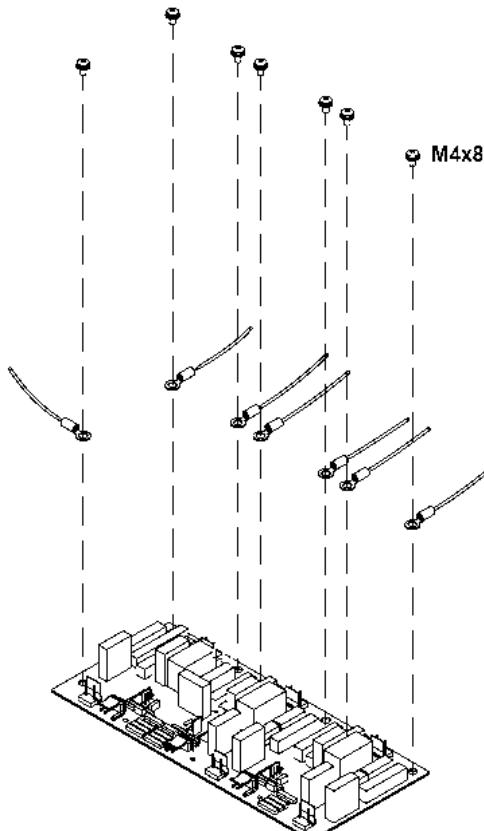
(a) Disassembly of the Snubber, Trigger and Soft charge protection
